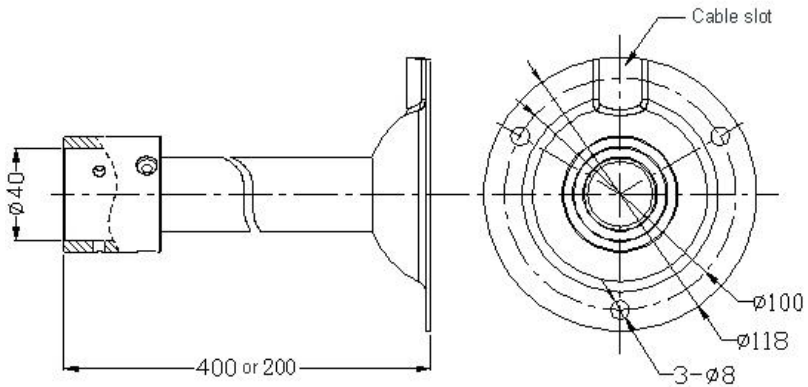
Dimension of the installing bottom board of the Wall Bracket for Outdoor Nine-inch (Seven-inch) Constant Speed Dome Camera
